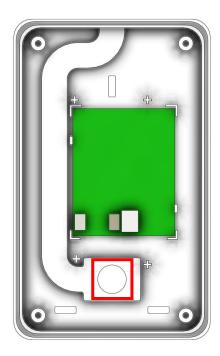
Rear entry for cable routing (boxed in red) for the power cable assembly and the audio Y-cable assembly.
